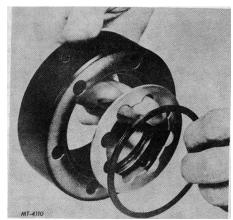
Removing Spirolox Lock Ring and Thrust Washer
